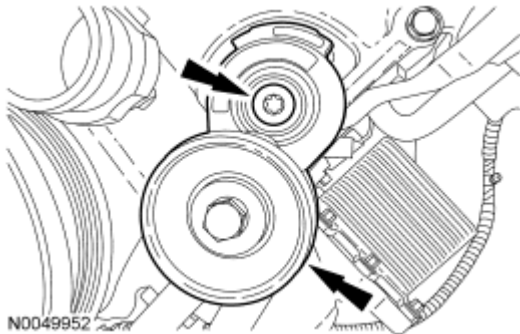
Locating Accessory Drive Belt Tensioner Bolt
